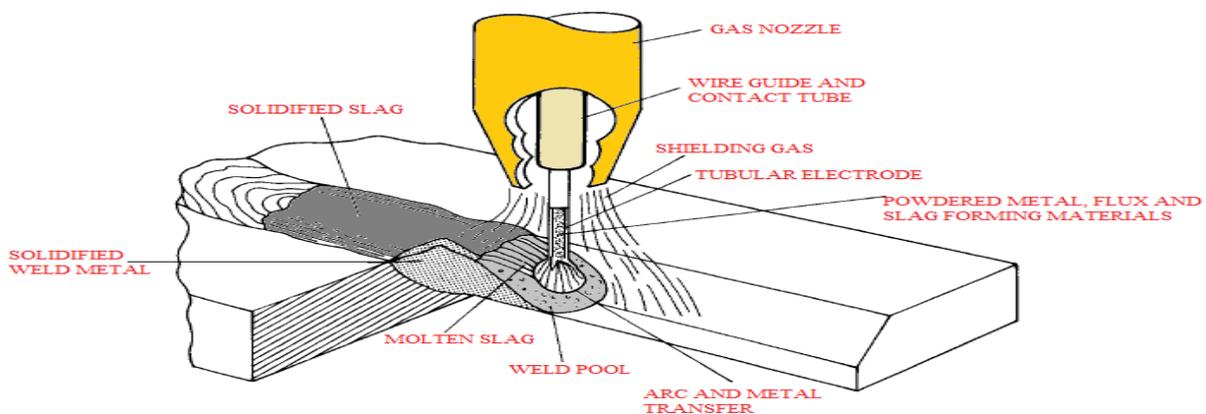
Gas-shielded flux- cored arc welding [46].
